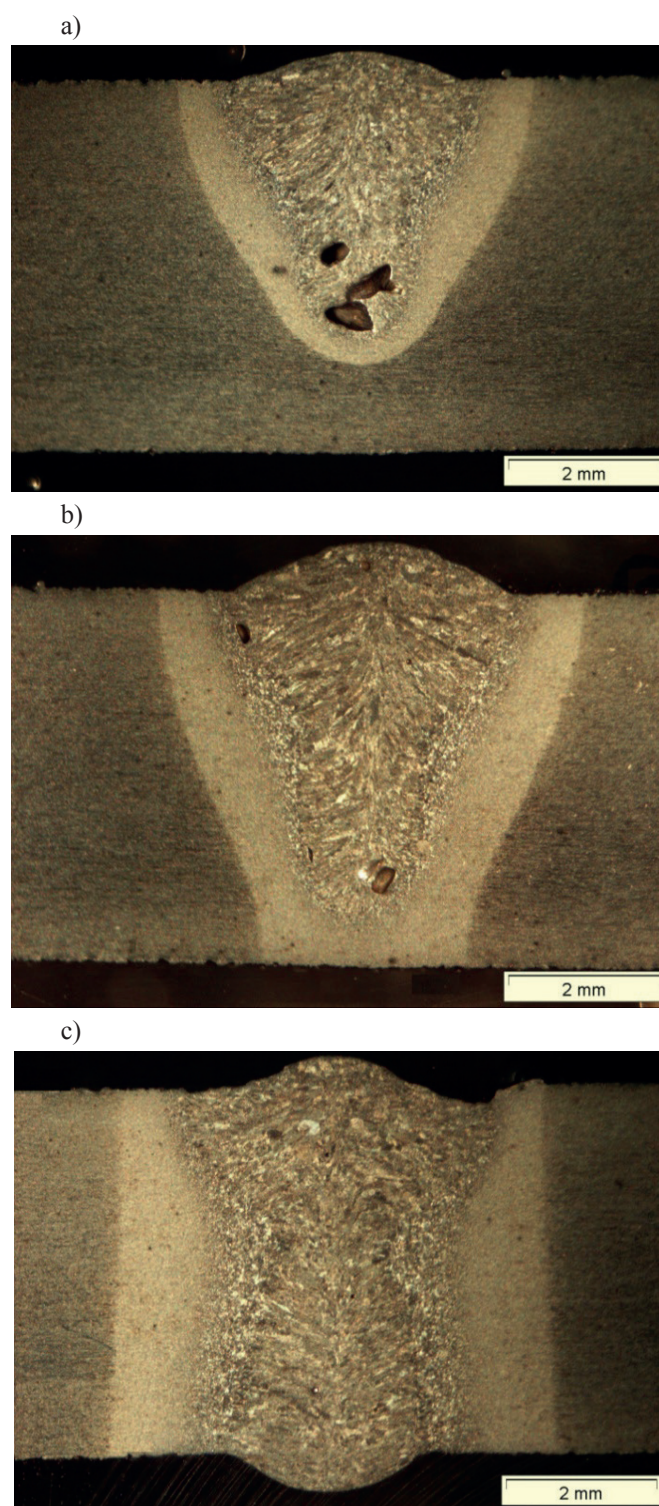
Macrostructure on cross section of the bead-on-plate weld produced at constant welding speed of 500 mm/min and laser power: a) 1500 W (heat input 180 J/mm), b) 2000 W (heat input 240 J/mm), c) 2500 W (heat input 300 J/mm)
